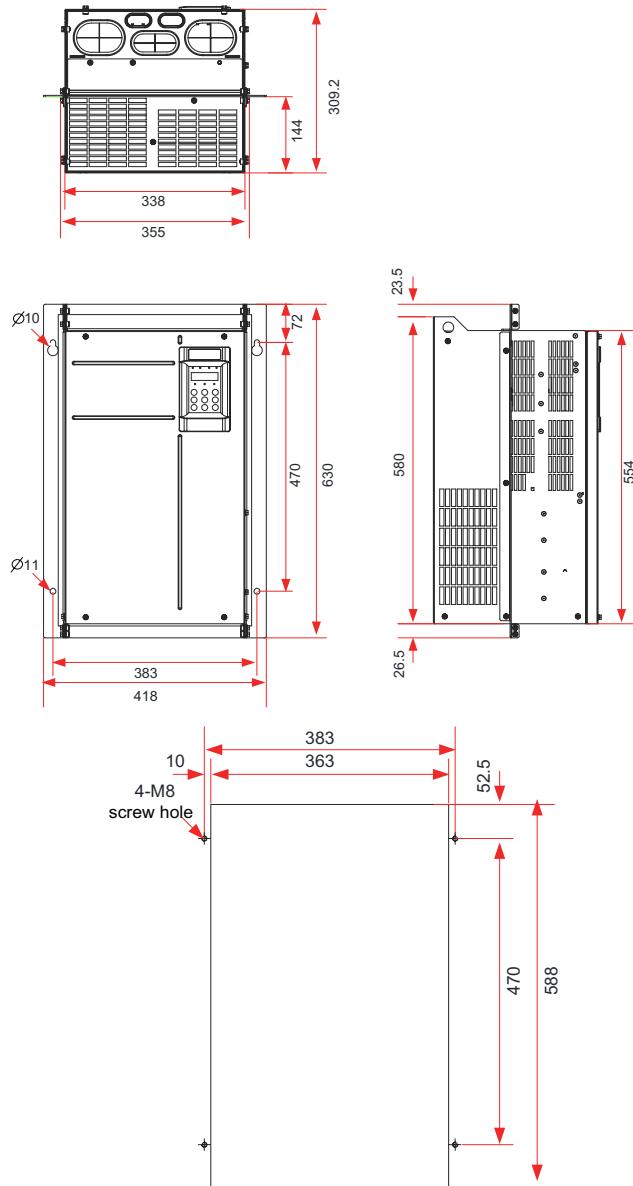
Through-hole mounting bracket and mounting hole dimensions for 75–110 kW AC drive models (mm)
